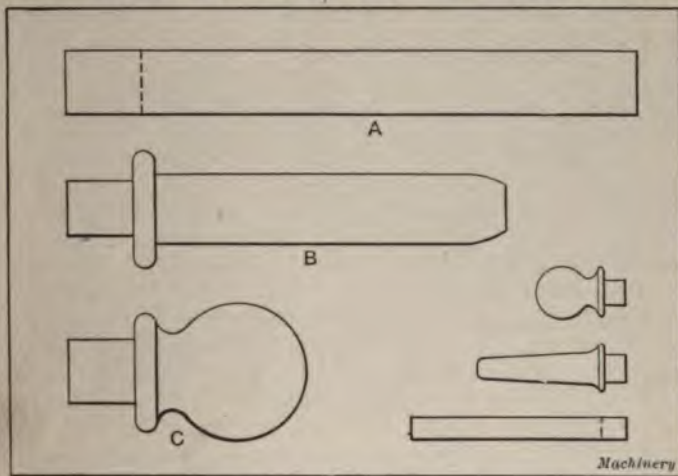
Typical Examples of Reheading requiring an Open-die Machine
